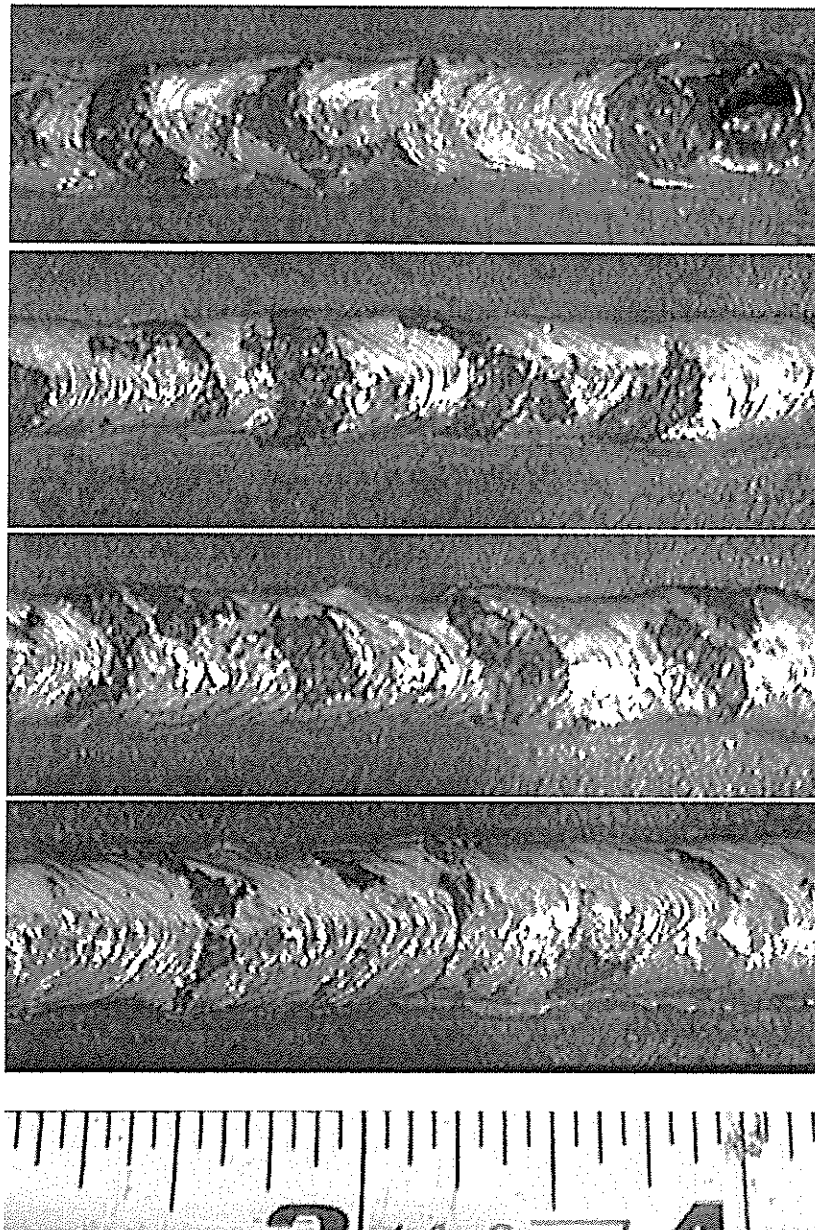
(a)~(d) Appearance of welds with shroud at different feed rates
